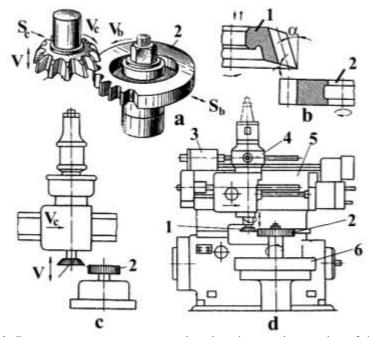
Rotary type gear cutter: a – drawing; b – cutting angles of the cutter;
